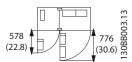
Front Clearance of IP21/IP54 Enclosure Type, Frame Size F9
